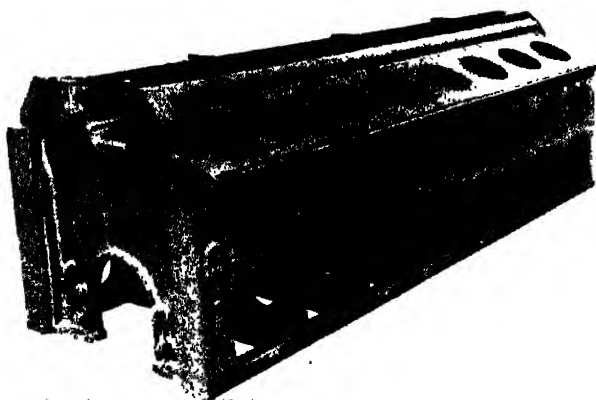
CRANKCASE FABRICATED FROM MILD STEEL PLATE, and arc welded. It is for a large locomotive diesel engine.
